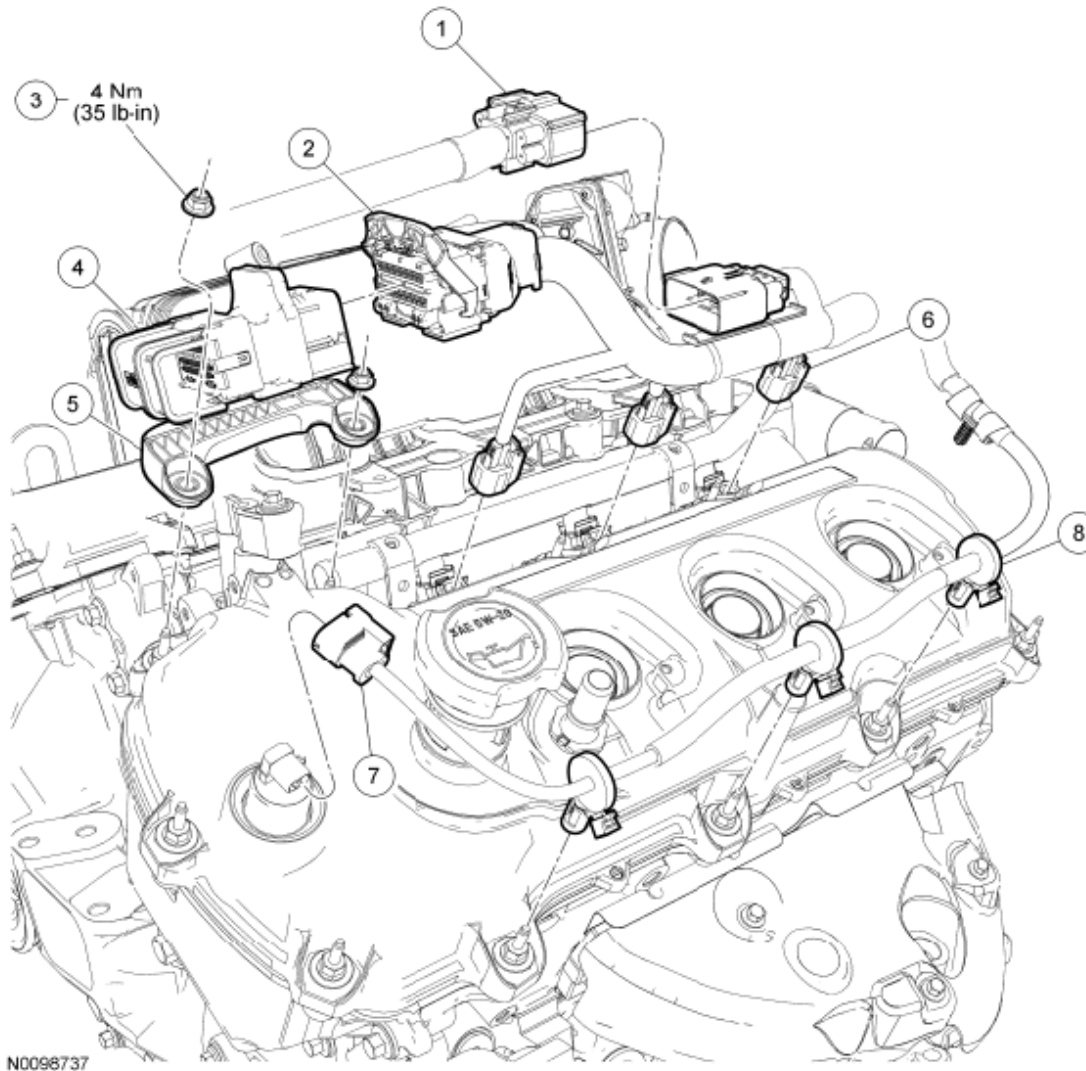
Identifying Valve Cover Components With Torque Specifications LH (1 Of 2)
